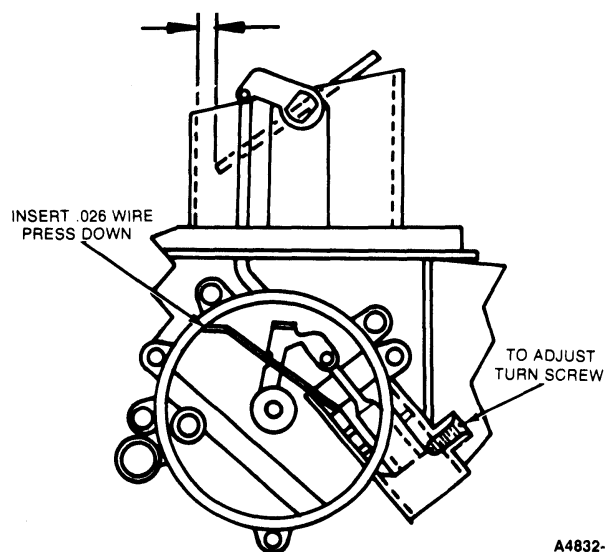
Choke Plate Pulldown—Holley 4180 C-4V (Hot Air with Electric Assist) Carburetor
